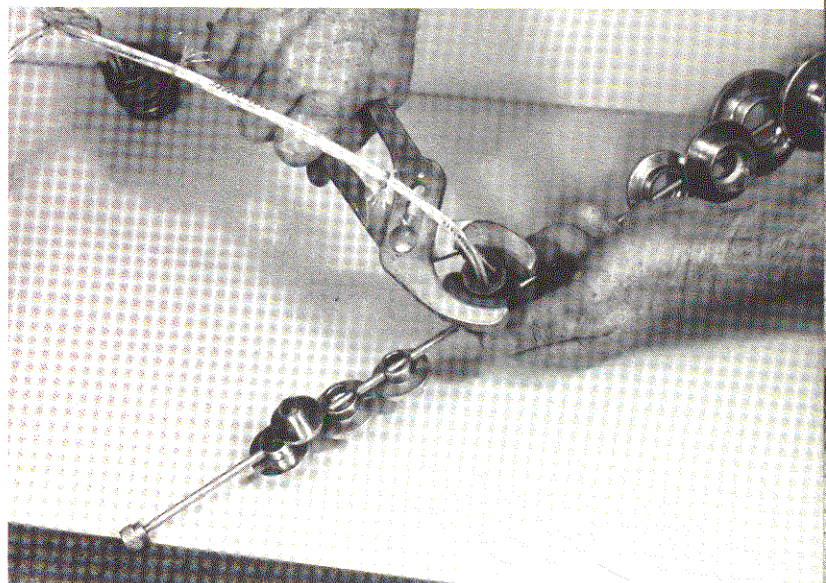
Tightening Back Shell of Bendix "PT-CE" Connector, Using Holding Fixture and L206C26-1 Pliers
